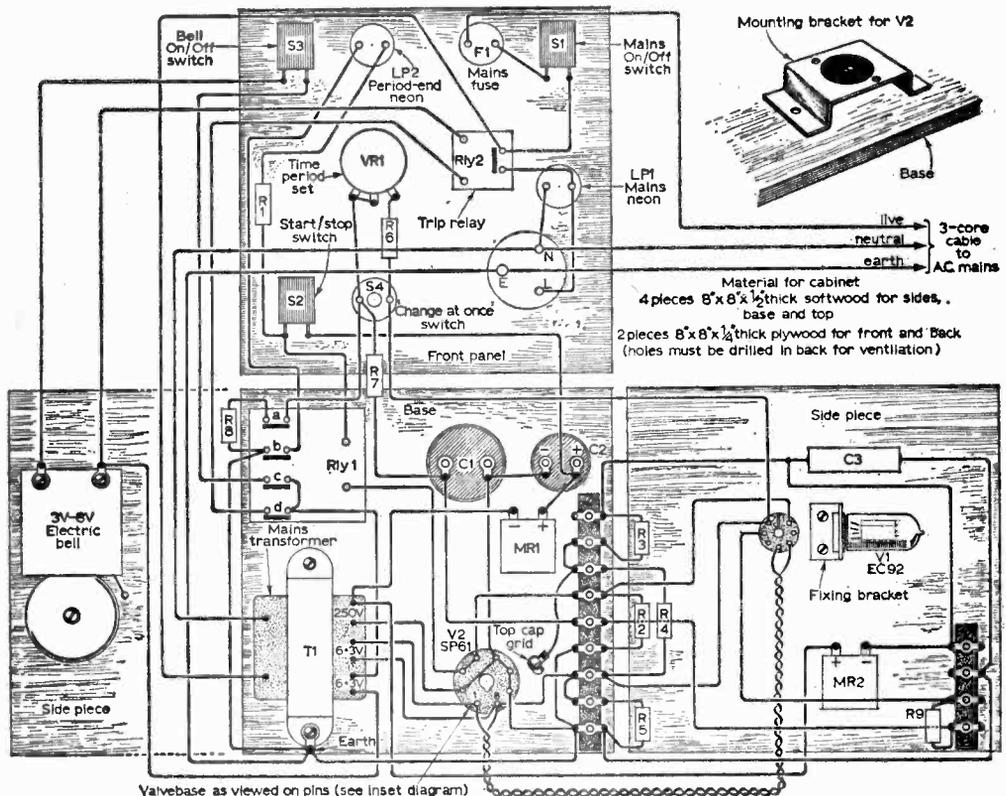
The complete wiring diagram. The side and front panels have been lain flat to make the wiring clear.
